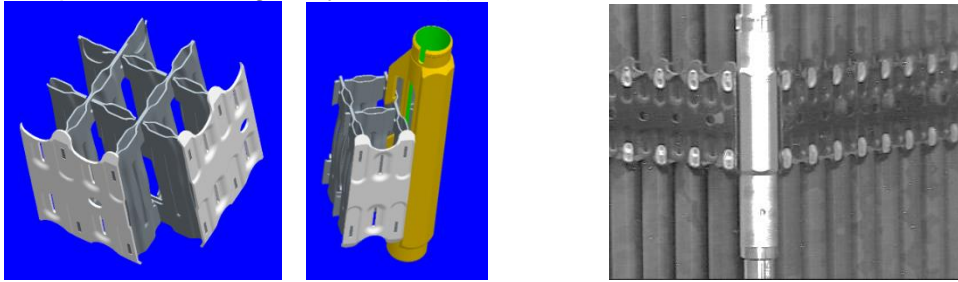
Cut damaged spacer corner (left) and insertion of an undetachable sleeve /2/
